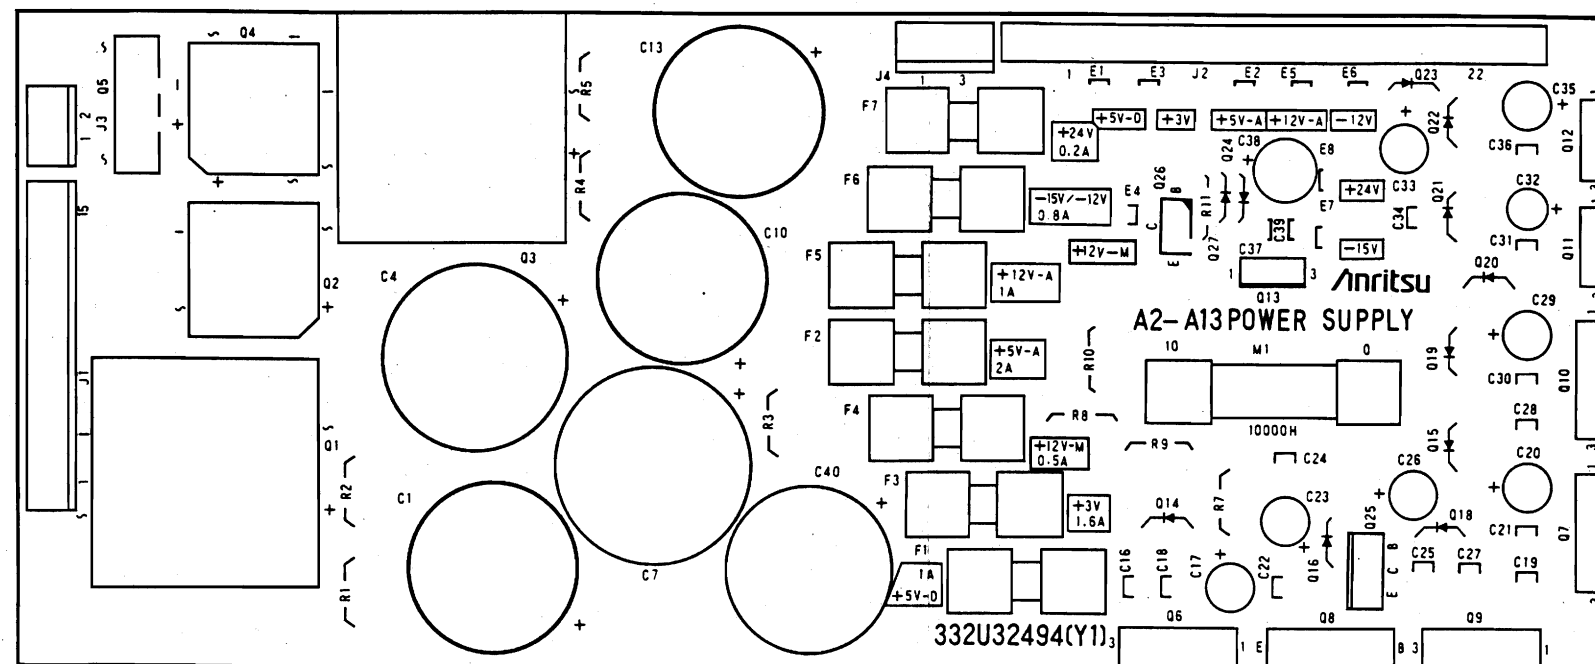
A2-A13 POWER SUPPLY PC-Board Parts Layout 15
